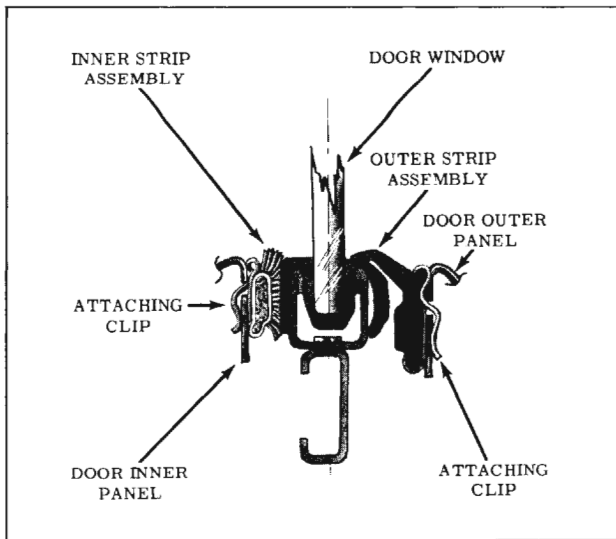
Glass Run Channel Inner and Outer Strip Assemblies
